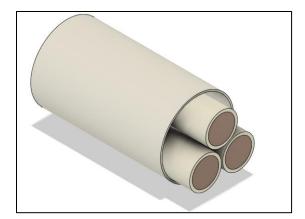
Wire Harness for Three 400 KCMIL Wires
